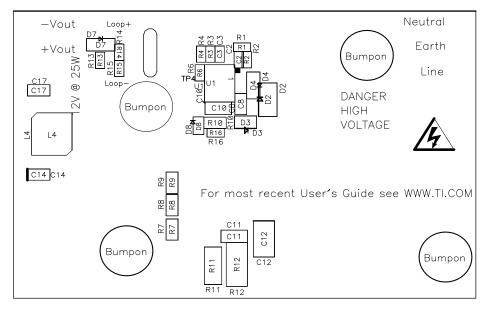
Bottom Layer Component Placement of UCC28610EVM-474 Rev. A
